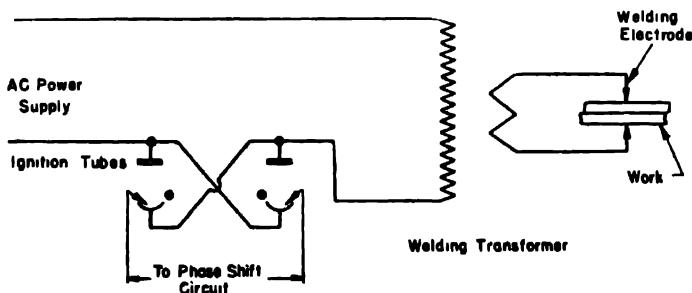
Elementary diagram of a welding circuit using Ignitron power tubes.
